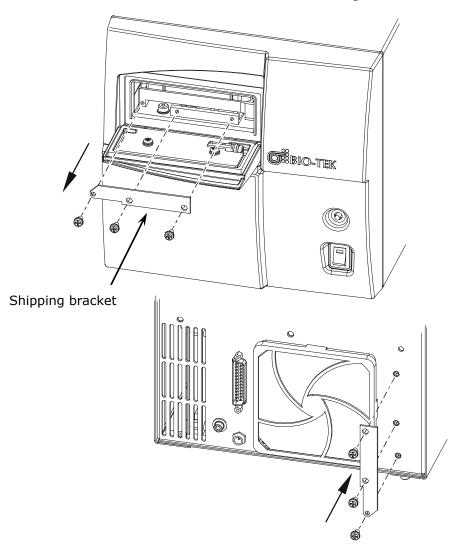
Remove the carrier shipping bracket and store it on the back of the reader
